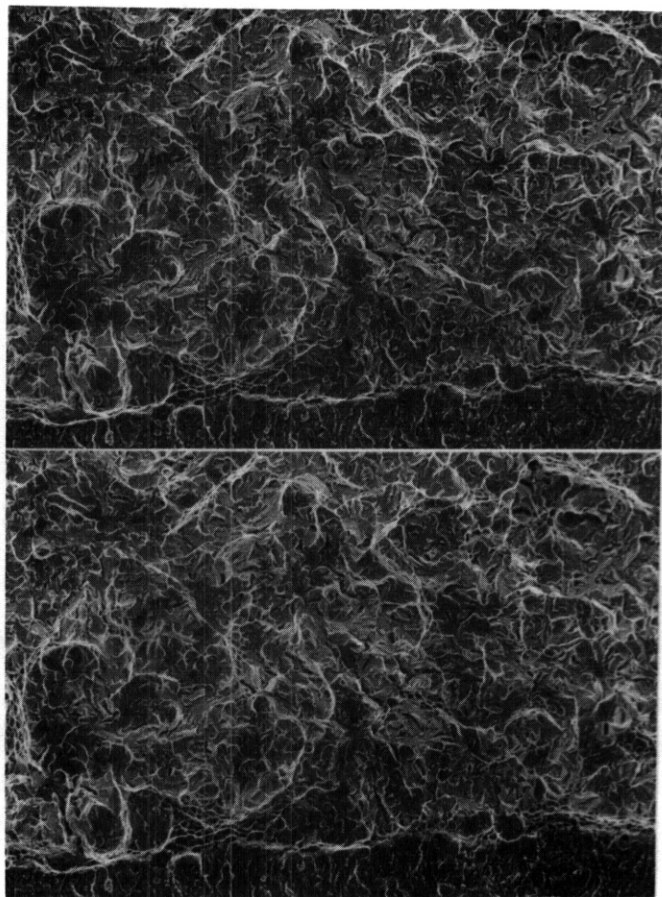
Fractographs of HT-9 weld metal specimen AK02 following irradiation to 11 dpa and testing at 75°C at a) low magnification and b) intermediate magnification.
